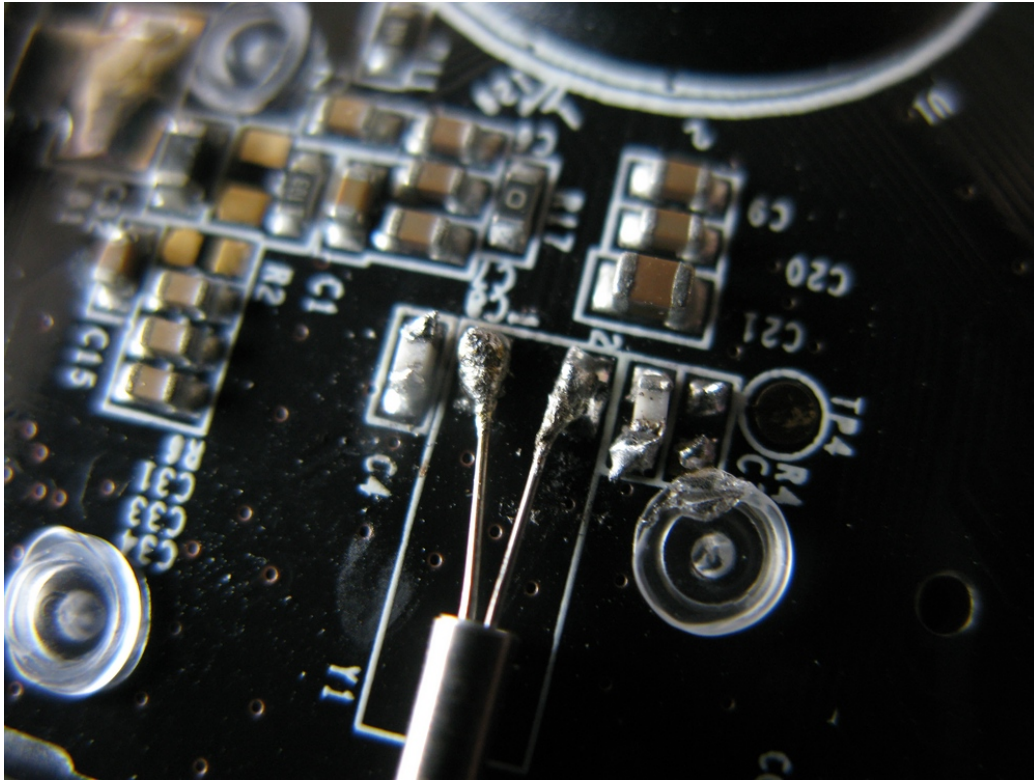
Shorten contacts of clock crystal so that it fits in the Y1 rectangle. Put solder on crystal's legs and on PCB contacts. Kink the legs of the crystal so everything lies flat before soldering. Solder it in, while holding it with tweezers or your fingers. Note that the crystal has no polarity.
